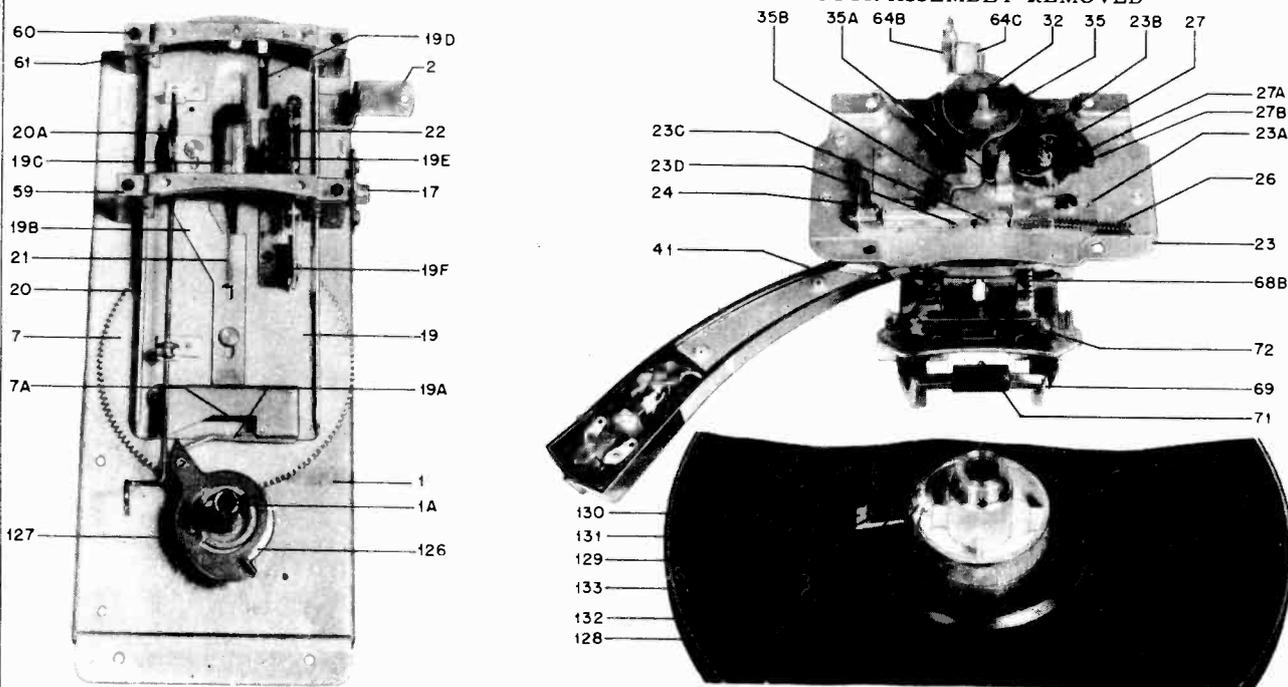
DISASSEMBLED VIEW OF RECORD CHANGER MECHANISM
